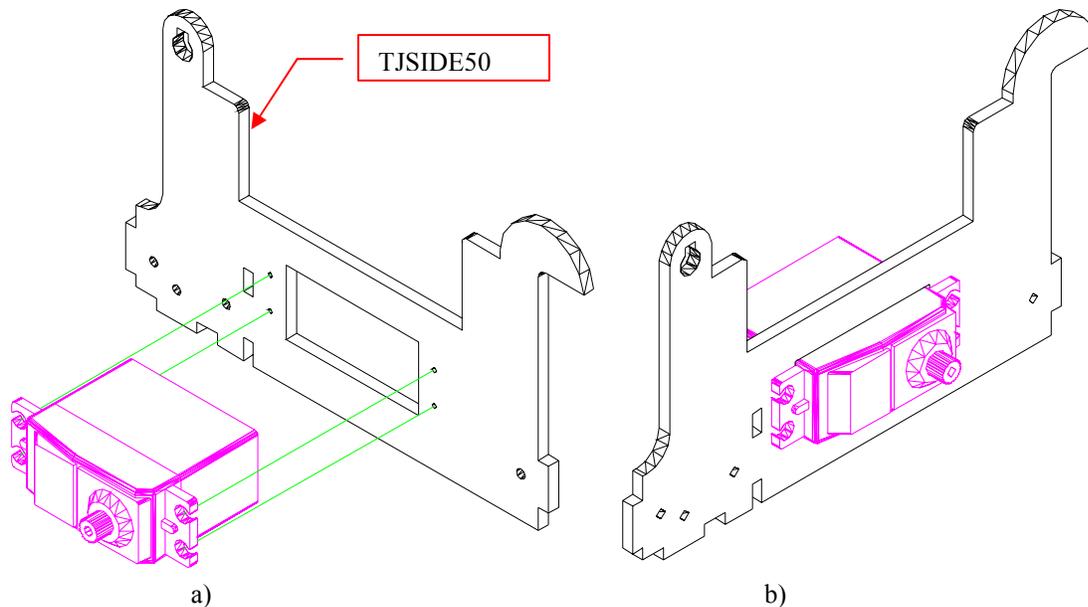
Slip the servos into the sides as shown in a) and b) and then fasten with four $\frac{1}{2}$ inch, 4/40 machine screws. Two screws on the diagonal, however, is sufficient and makes disassembly easier.
